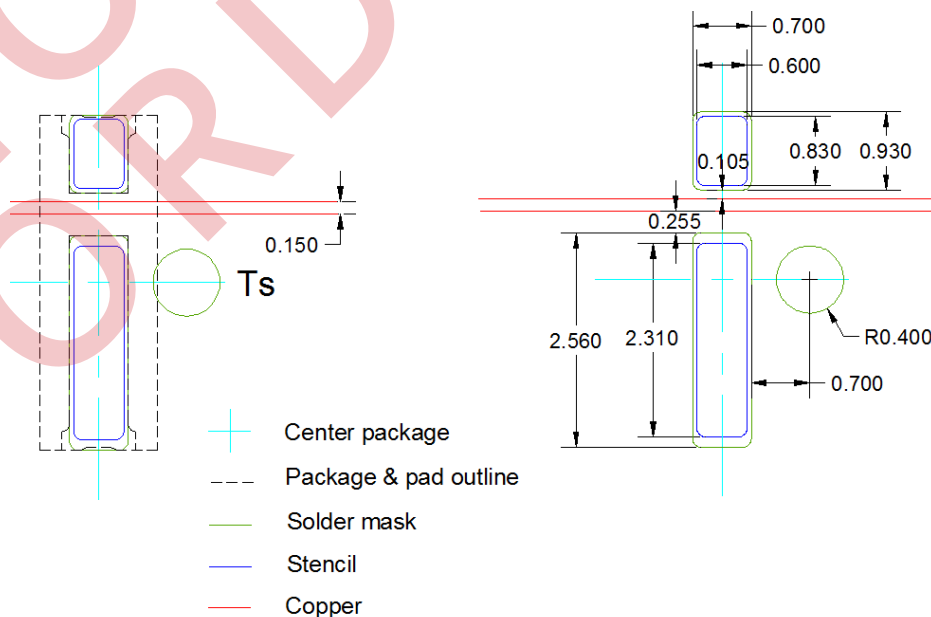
Recommended PCB footprint design for the LUXEON emitter. In order to ensure proper heat dissipation from the package electrodes to the PCB, it is best to extend the top copper layer of the PCB several millimeters beyond the package of the LUXEON emitter. See Section 3 for more information on the copper layout. All dimensions are in mm.
